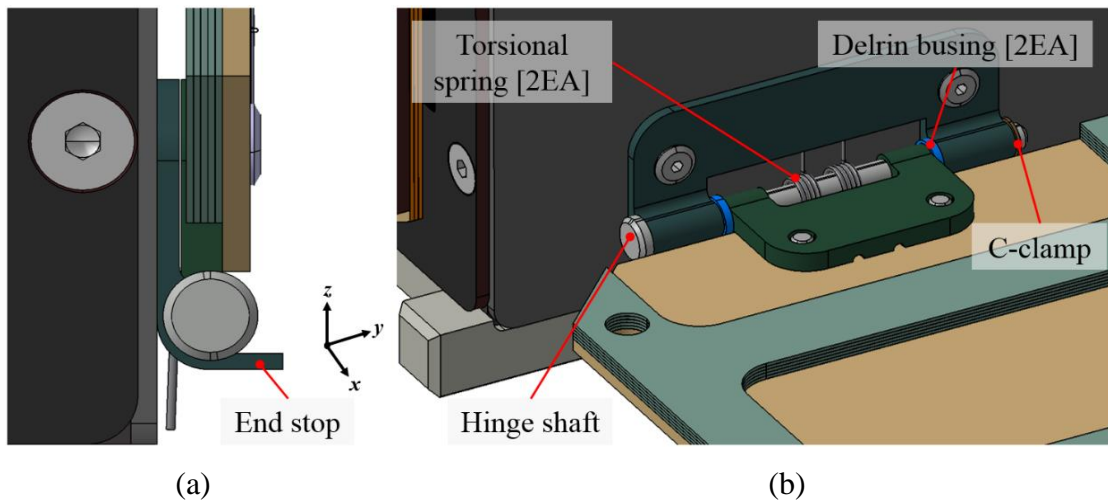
Conceptual Mechanical Design of Torsional Hinge: (a) Stowed and (b) Deployed.
